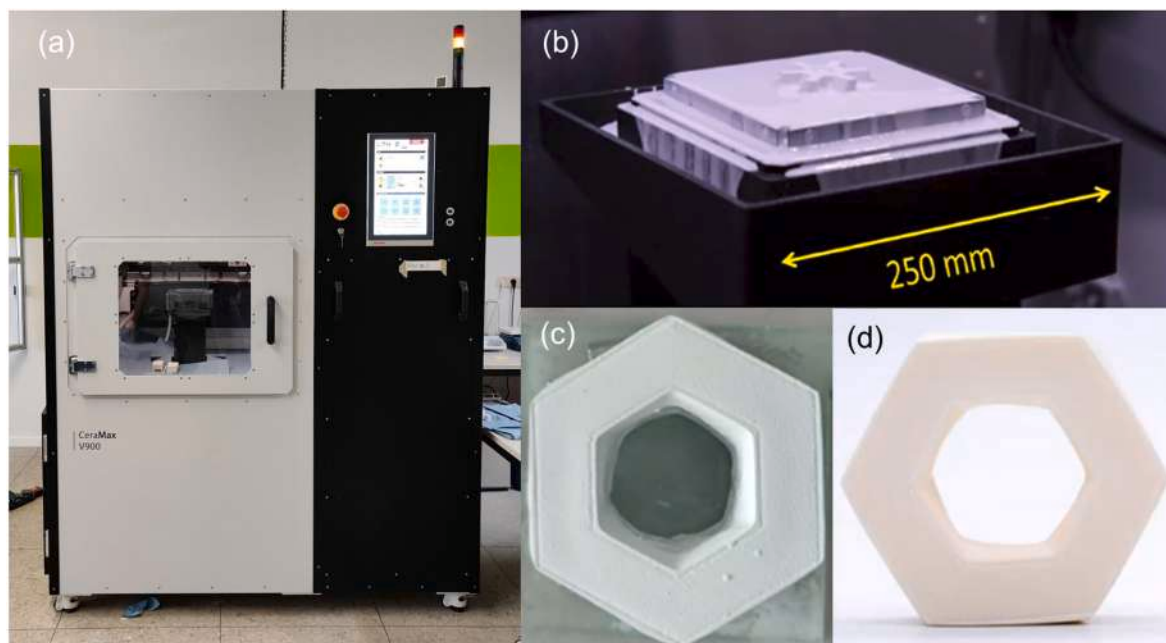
(a) The CeraMax Vario V900 machine for Laser Induced Slip-Casting employed in this work. (b) Details of the build platform, (c) and (d) examples LIS printed alumina parts.
